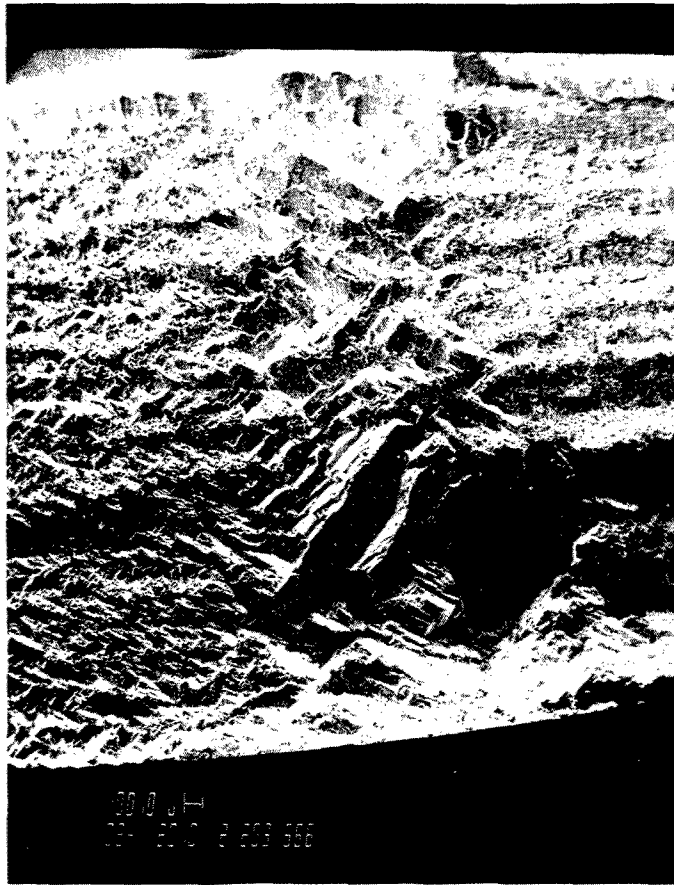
Fracture Surface of Specimen Tested in Air, Showing Transition Zone.
